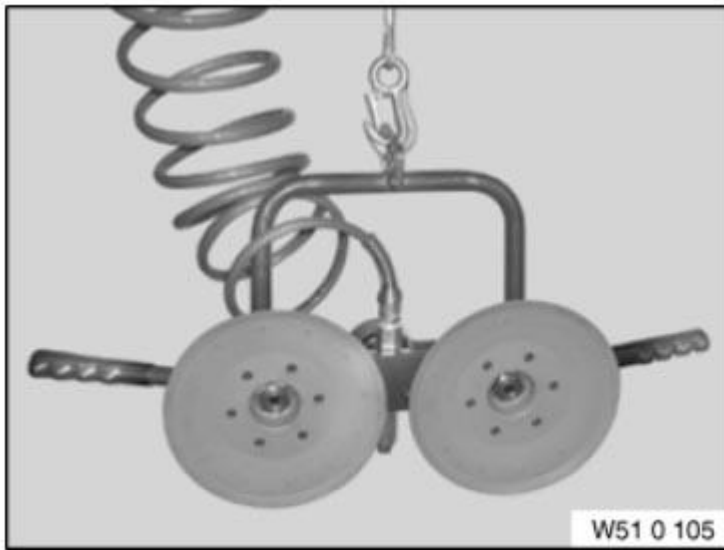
Identifying Side Window Locating Fixture (51 0 105)
